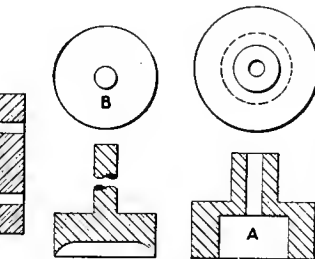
PUNCH USED IN DRAWING POWDER-CUP BOTTOM
